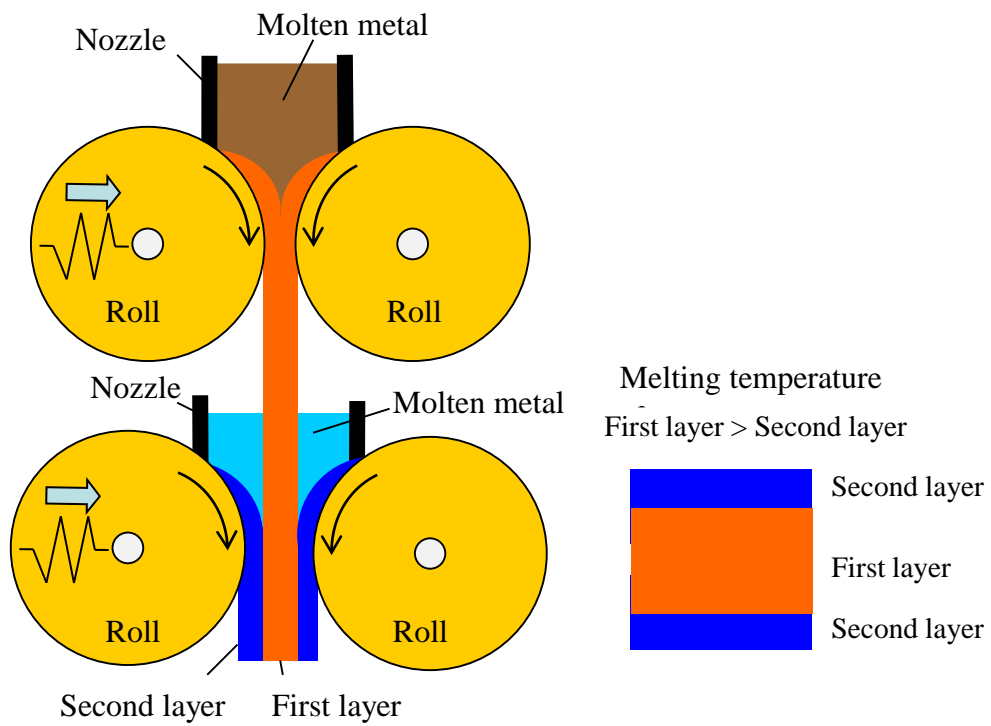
Vertical-type high-speed tandem twin-roll caster for fabrication of three-layered clad strip.
